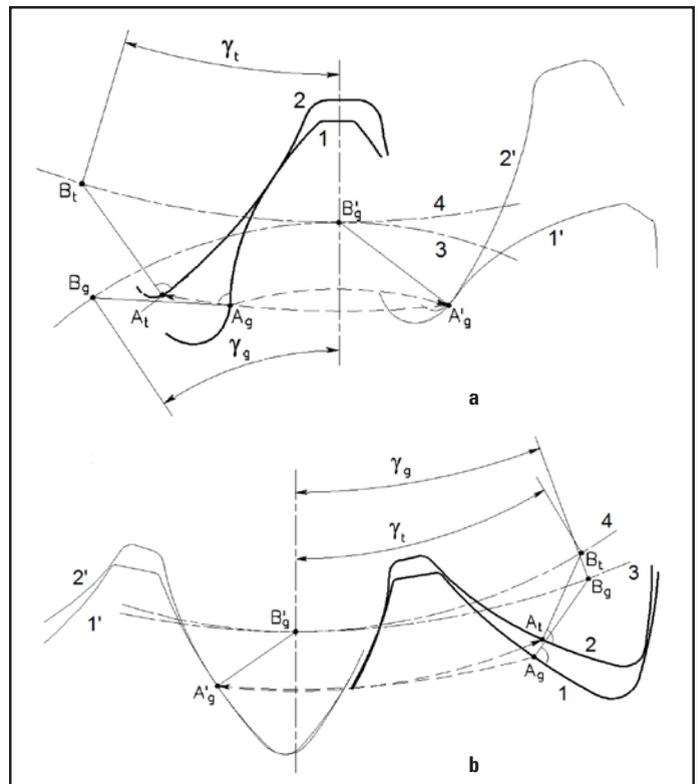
Generating gear shaper cutter profile definition for external (a) and internal (b) gears: 1 and 1' – gear profile positions; 2 and 2' – shaper cutter profile positions; 3 – gear pitch circle in mesh with shaper cutter; 4 – shaper cutter pitch circle in mesh with gear.
